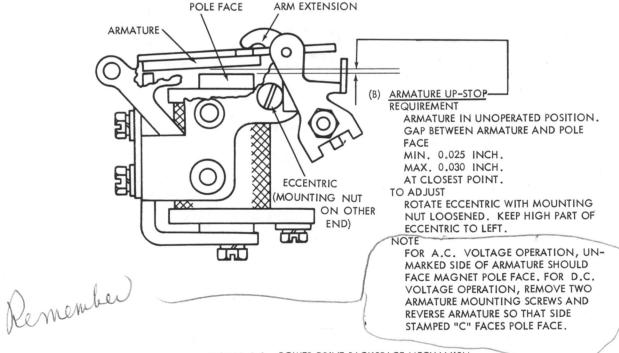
POWER DRIVE BACKSPACE MECHANISM
